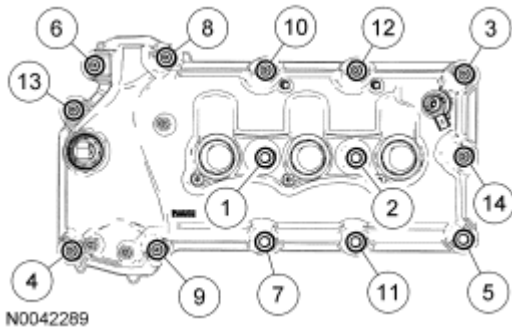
Identifying Tightening Sequence Of Valve Cover Bolts
